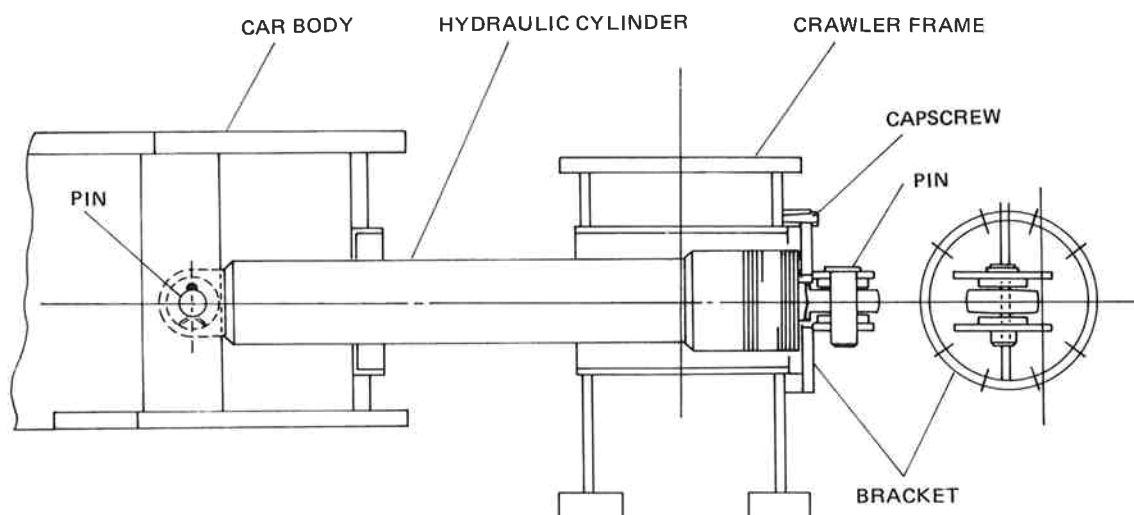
Crawler Frame Extension/Retraction Cylinder (Retracted)
